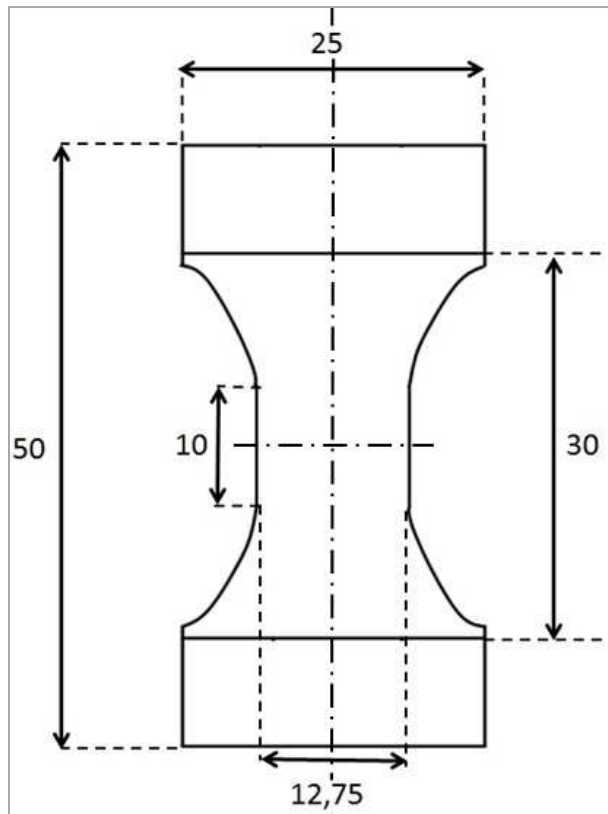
Shape and dimensions (in millimeters) of the sample used
